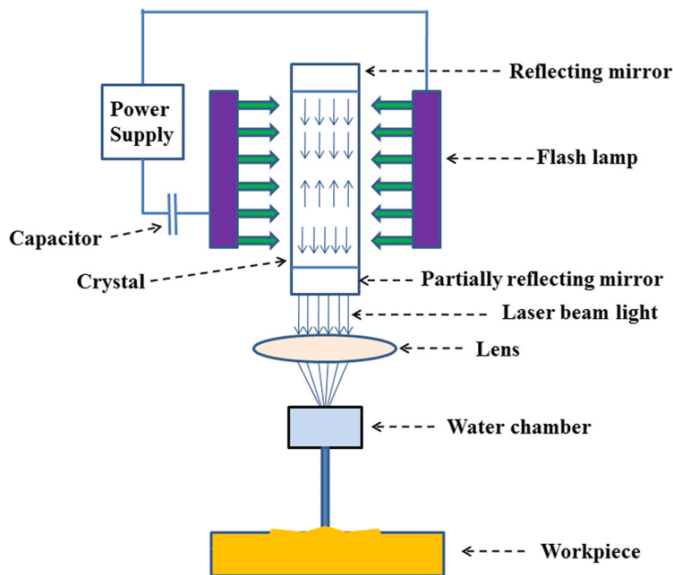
Laser Beam Machining (LBM) setup (Kumar, S., et al., 2021).
